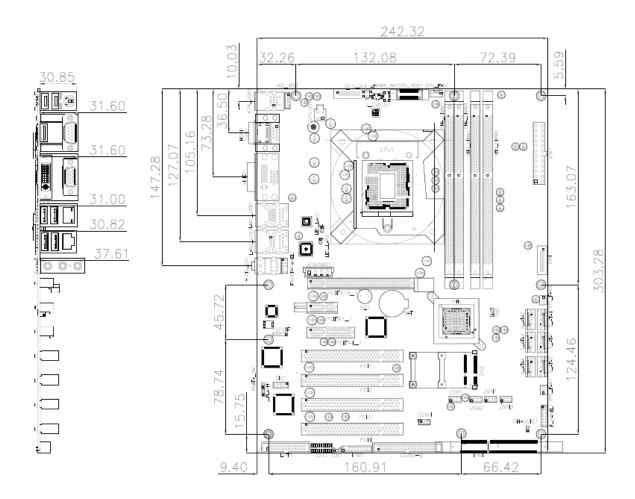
IMBA-Q870-i2 Dimensions (mm)
